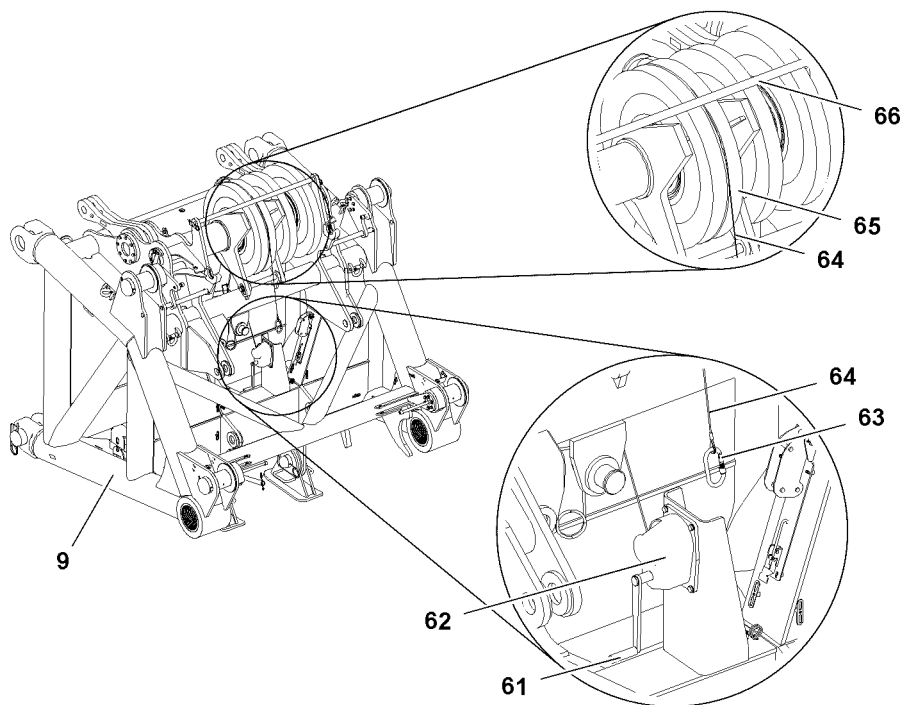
Install the retaining frame on the W-connector head - spool the wire rope of the manual winch out
